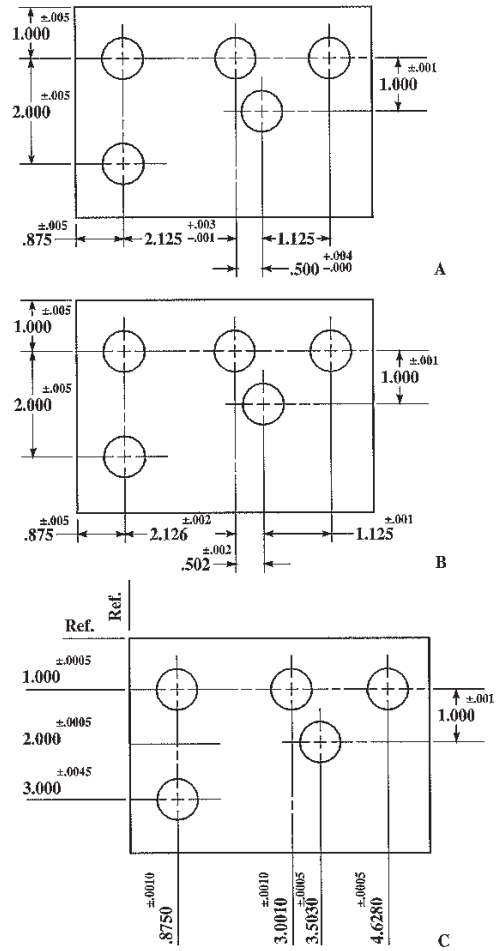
(A) Conventional Dimensions, Mixed Tolerances; (B) Conventional Dimensions, All Equal, Bilateral Tolerances; and (C) Coordinate Dimensions
